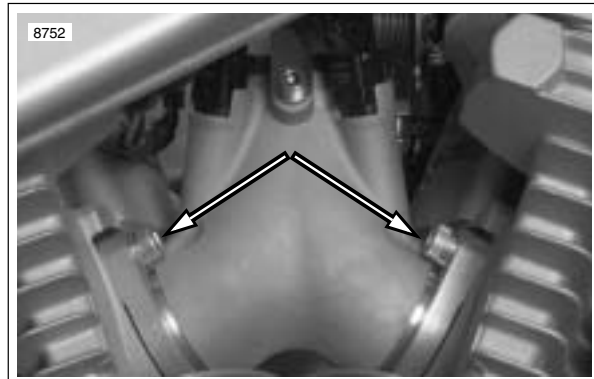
Intake Manifold Fasteners (Gearcase Cover Side)
